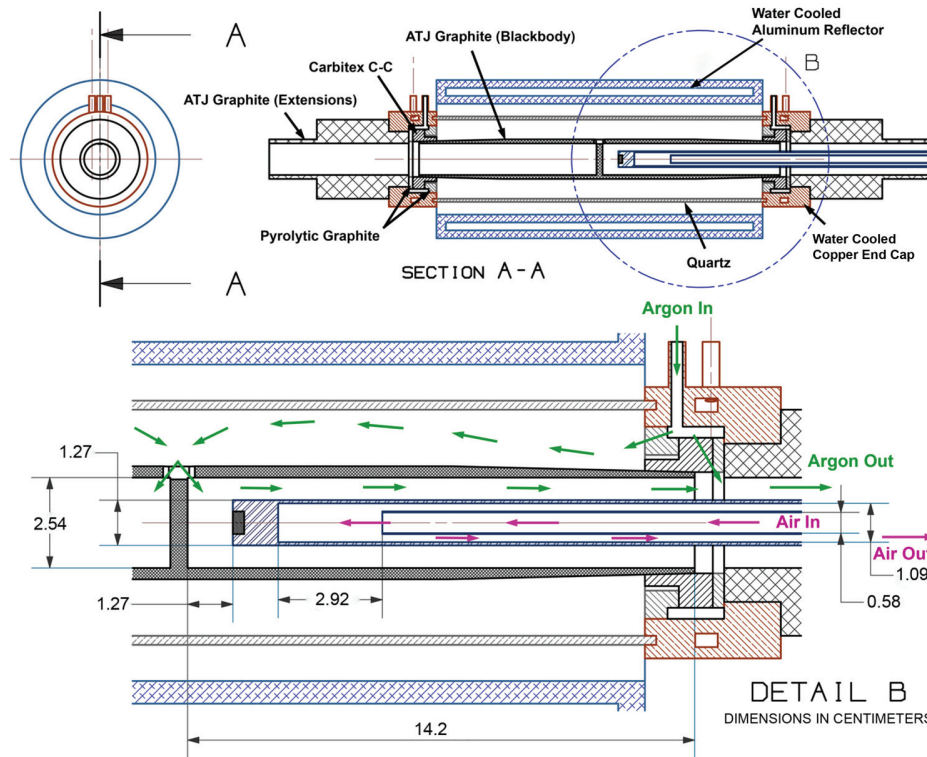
VTBB heater assembly section view showing system materials, gas flow paths, and location of the air-cooled HTHFS during testing.
